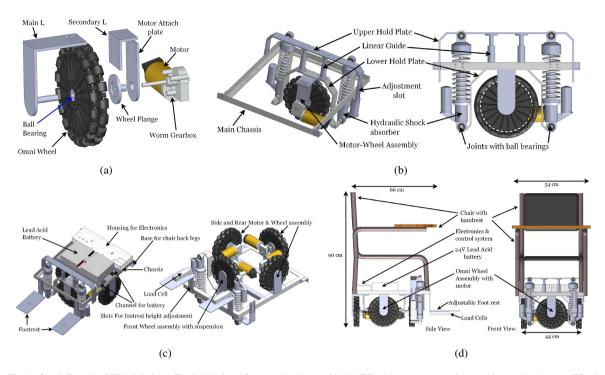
Omni directional Wheelchair: a) Exploded view of motor-wheel assembly. b) Wheel arrangement and suspension mechanism. c) Wheel chair base d) CAD model of developed wheelchair.
